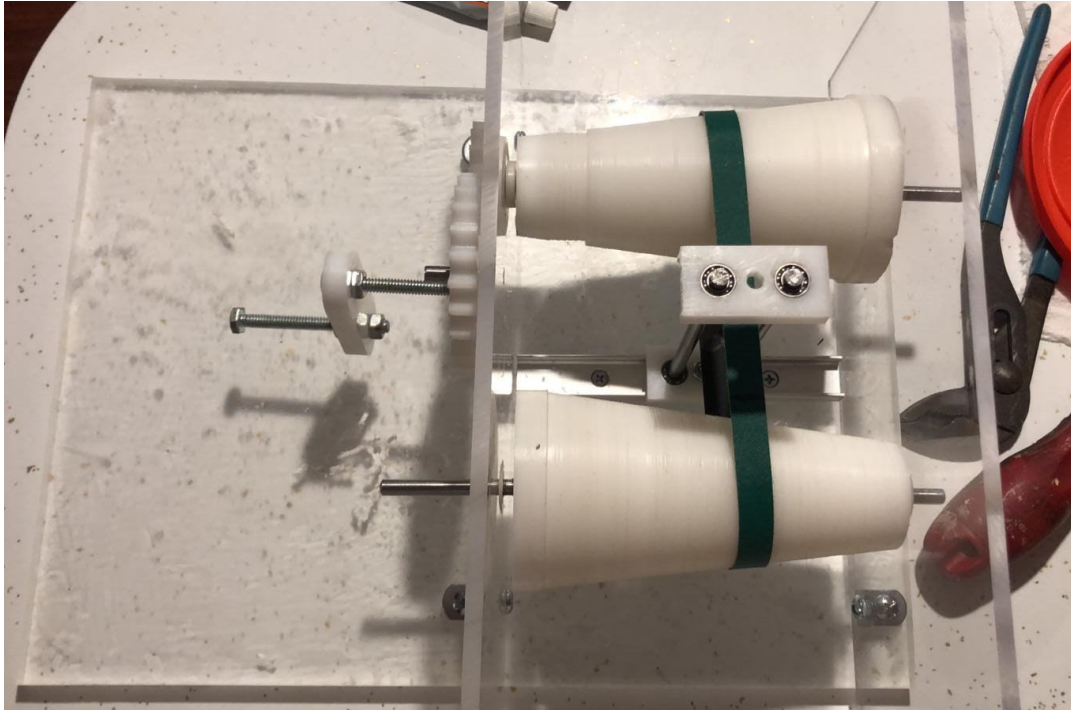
The manufactured CVT transmission fully assembled.
